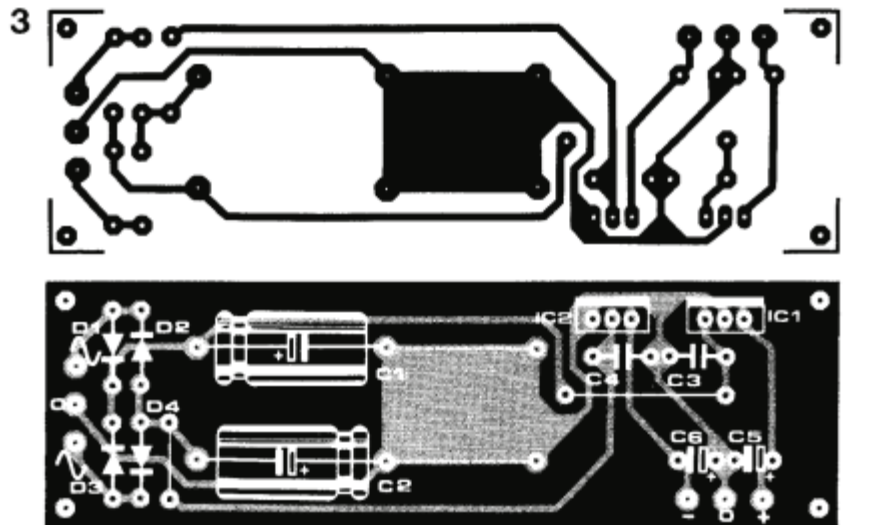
PCB layout and component placement guide for the circuit shown in [Figure 1](#)
